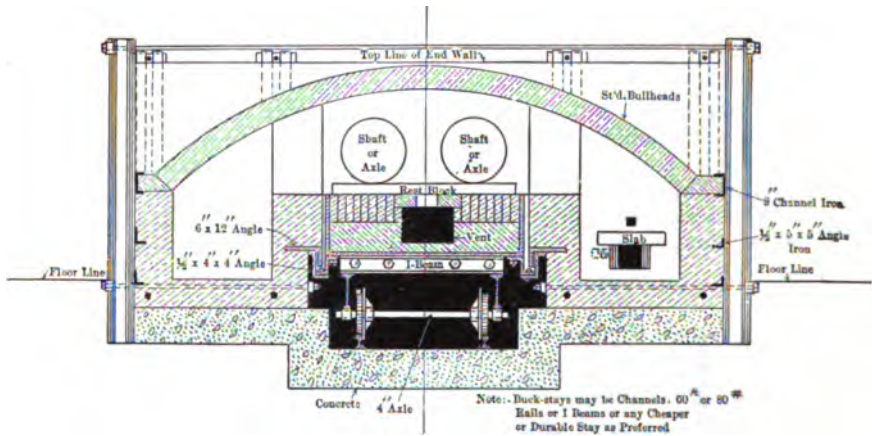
Car-type shaft annealing furnace of modern design, view showing two shafts or axles in the furnace.
